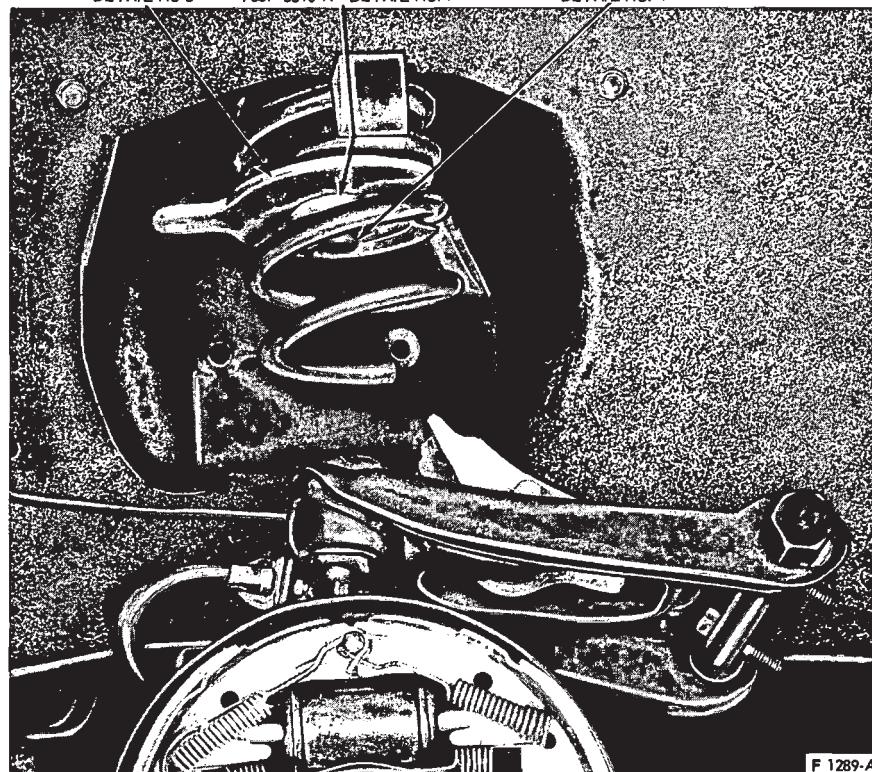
Compressing Spring—Lower View—Montego, Falcon, Fairlane and Maverick
